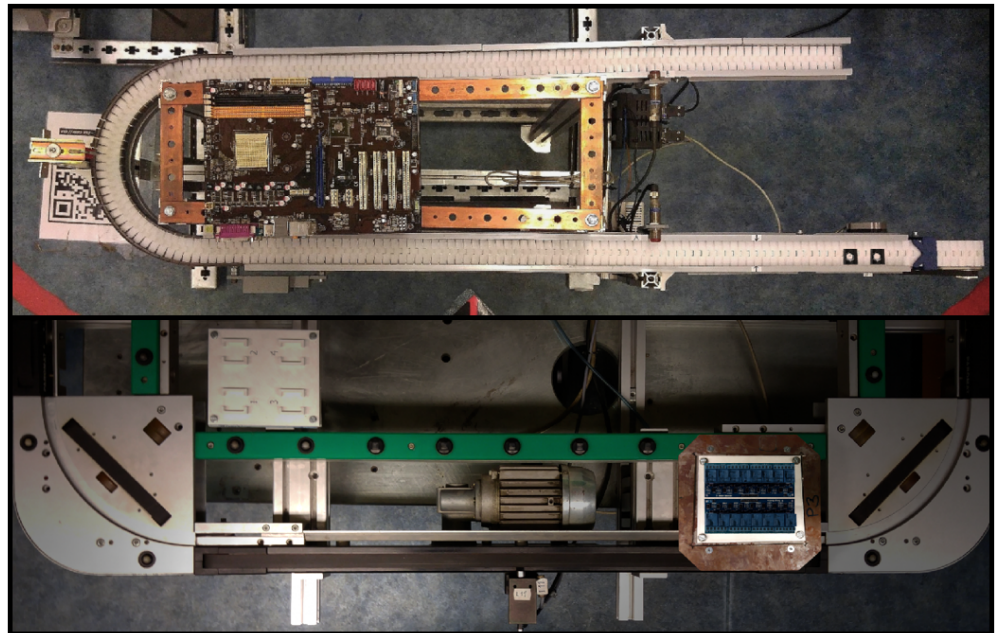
Workpieces on Flexlink XK and PARO QE conveyors.
